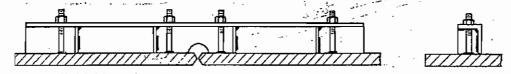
Weld clip along one edge only, so it may be removed easily with a hommer. Drive steel wedge below clip until plote edges are in alignment.
